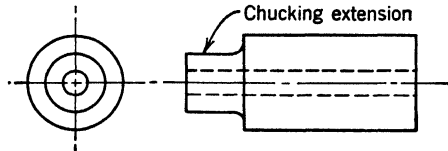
Casting designed with a chucking extension to facilitate machining of entire casting without removing from chuck.
